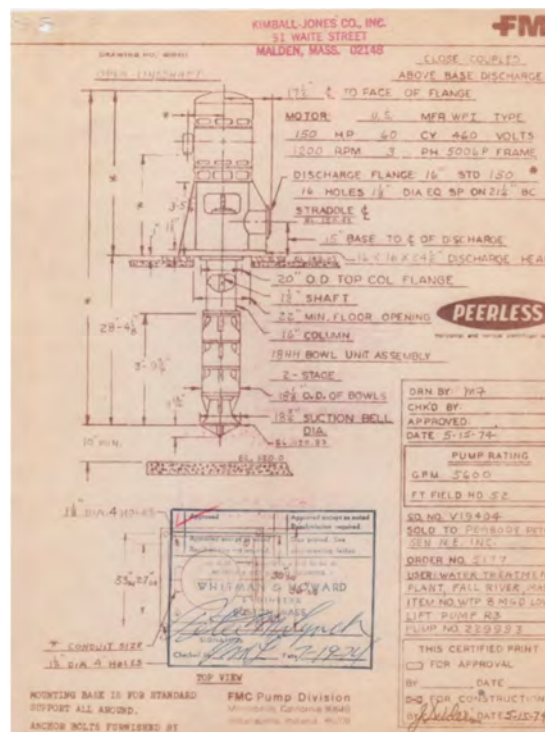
Fall River Filtration Plant Raw Water Pump Drawing with Elevations
